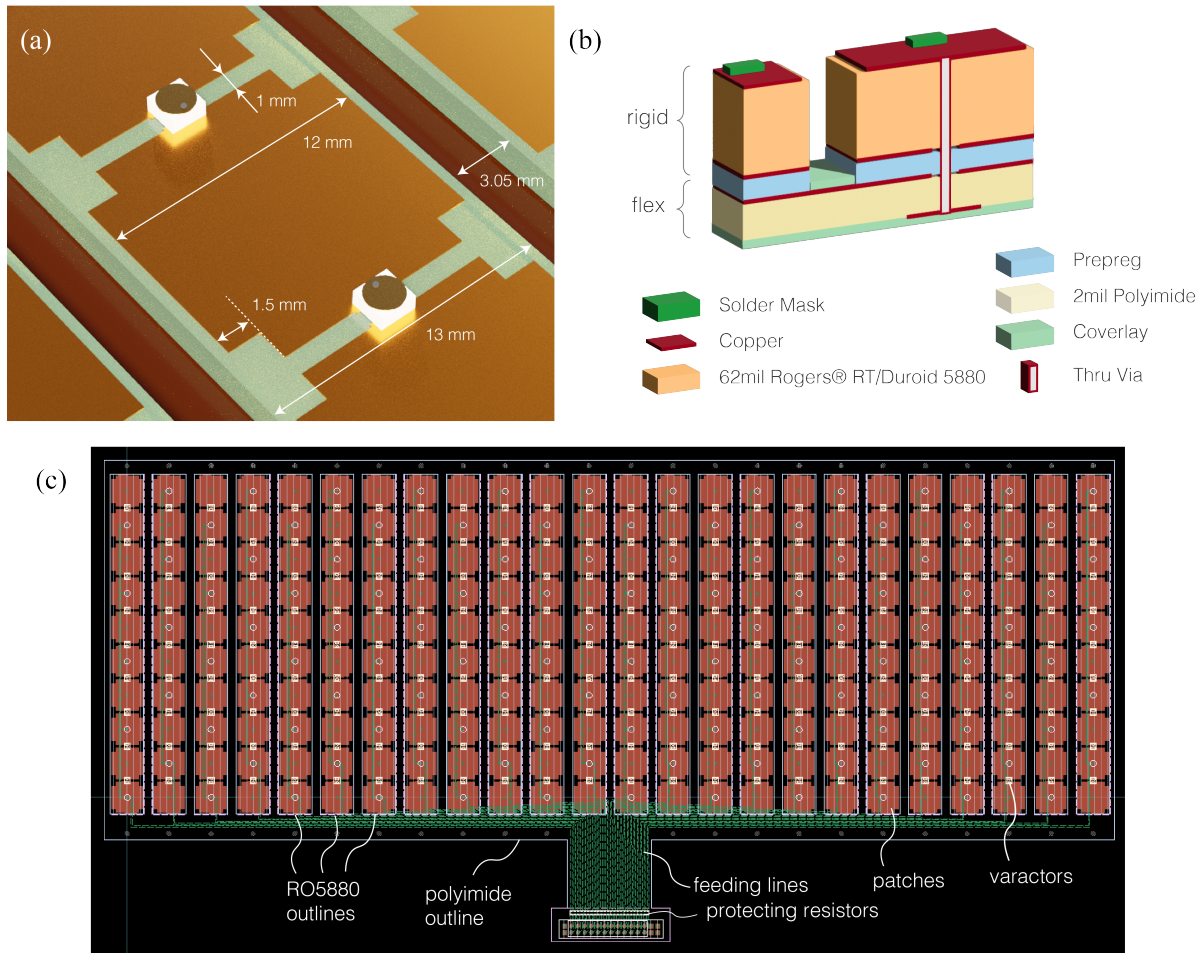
Rigid-flex PCB design. (a) Dimension of the unit geometry. (b) The stack-up plot of the rigid-flex board. Dimensions are not proportional. (c) A drawing of the fabricated board. Ground layers, prepreg layers, and coverlays are not shown.
